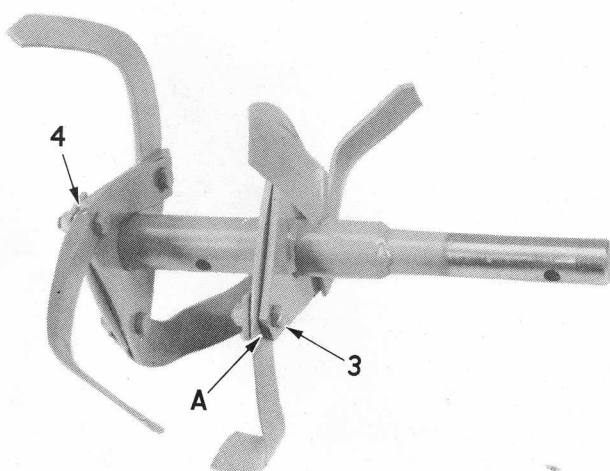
Sections 3 and 4 Illustrating Tines Converted for Offset Mounting to Right Side of Basic Tiller
